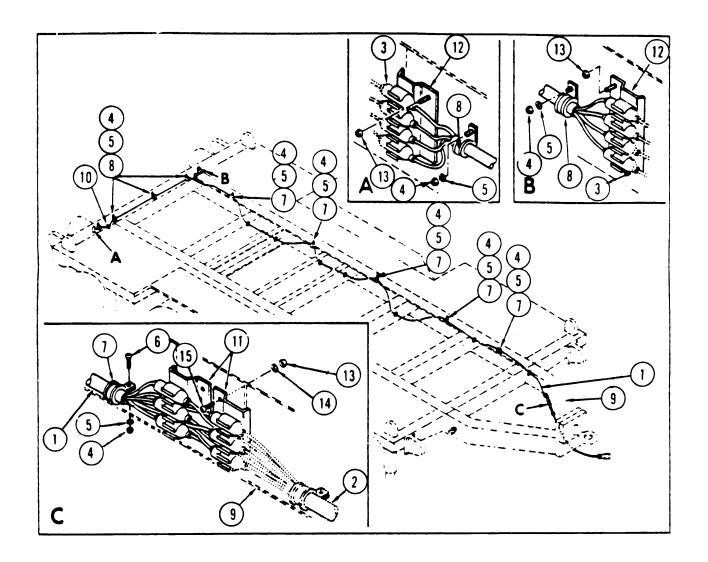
Trailer Wiring Harness Assembly (ARMY)
